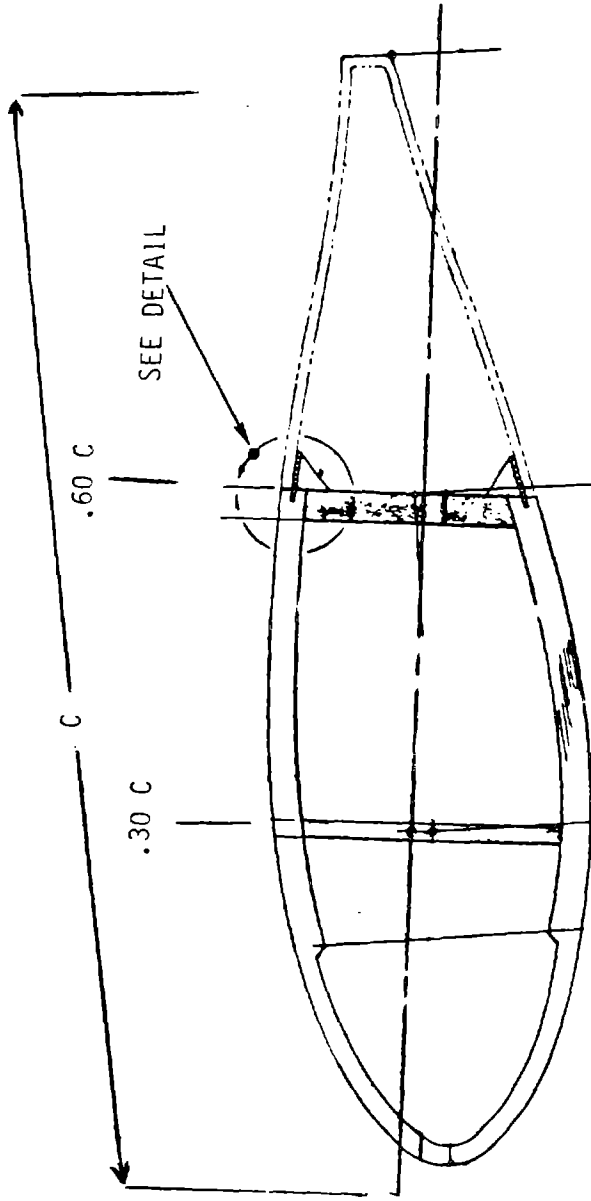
Typical Cross Section and Trailing Edge Mounting Provisions
